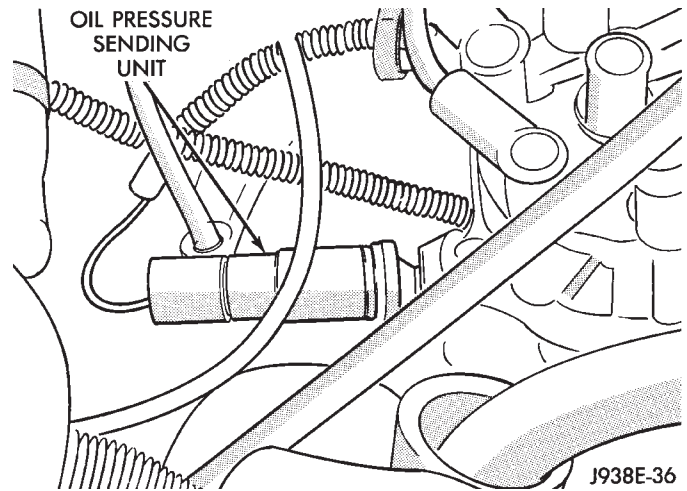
Oil Pressure Sending Unit - 4.0L Engine
